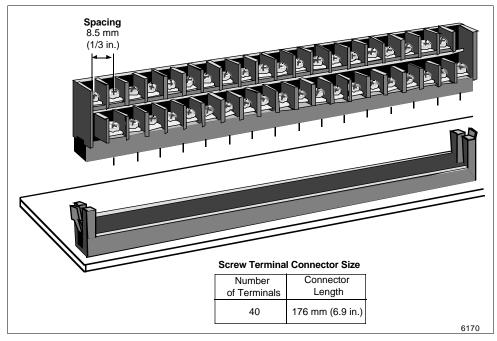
Typical FTA Fixed-Screw Terminal Connector
